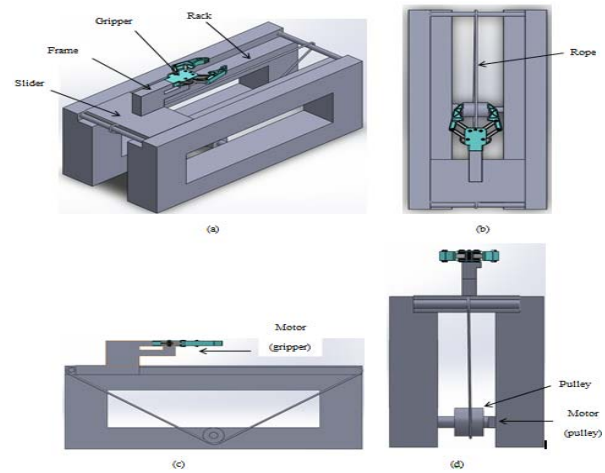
Mechanical drawing of the complete transfer mechanism (a) isometric view (b) top view (c) side view (d) front view.
